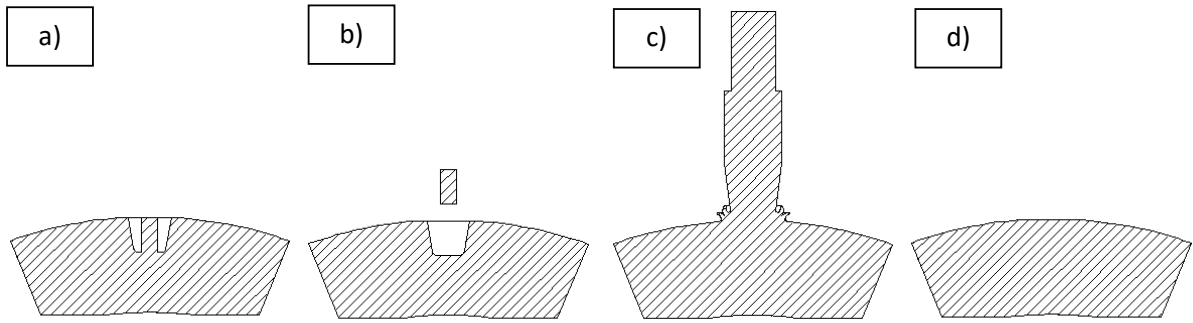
Coring and tapered hole preparation process: a) cylindrical core sample is machined, b) core sample is removed, c) FHPP weld is performed, d) stud and flash are removed [102].
